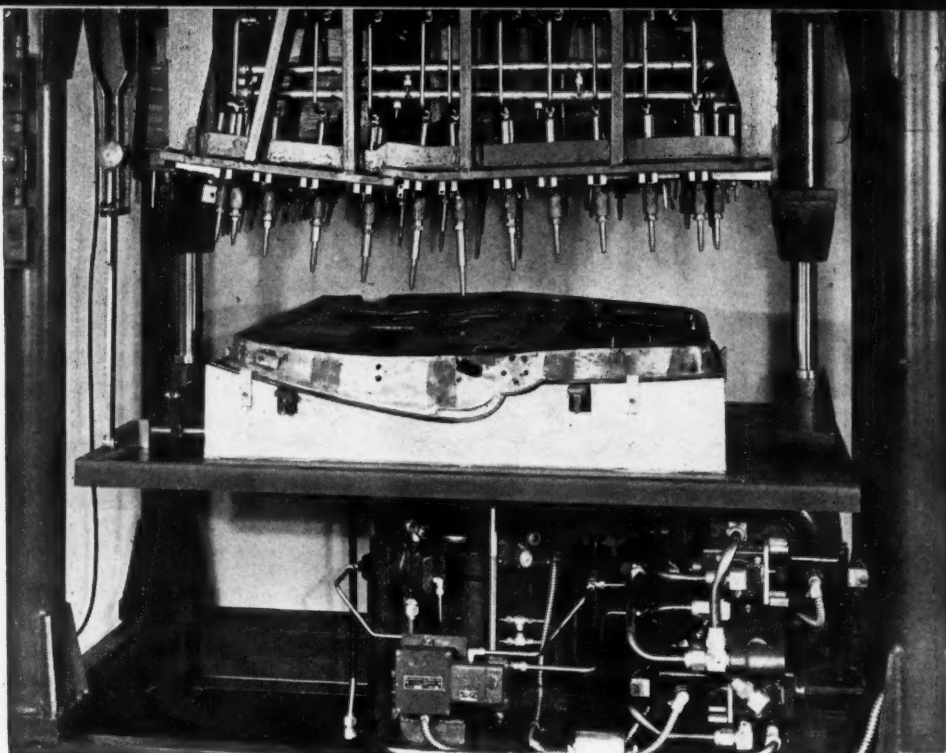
Automobile Doors are Assembled on This Automatic Welding Press at the Rate of 400 per Hour by Making Sixty Simultaneous Spot-welds
